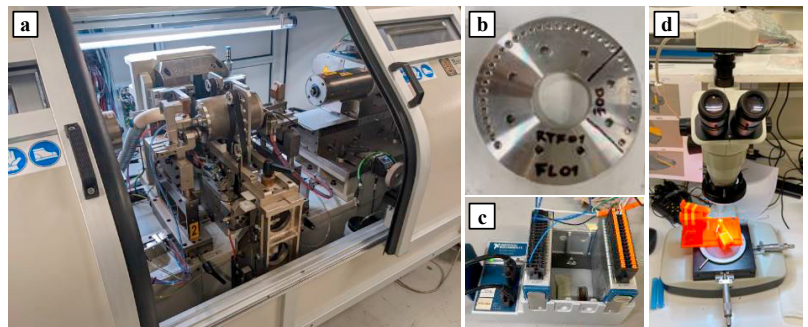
Experimental set-up: a) balancing machine RB50A; b) workpiece flange; c) measurement set-up and DAQ; d) Optika SZN-T microscope.
